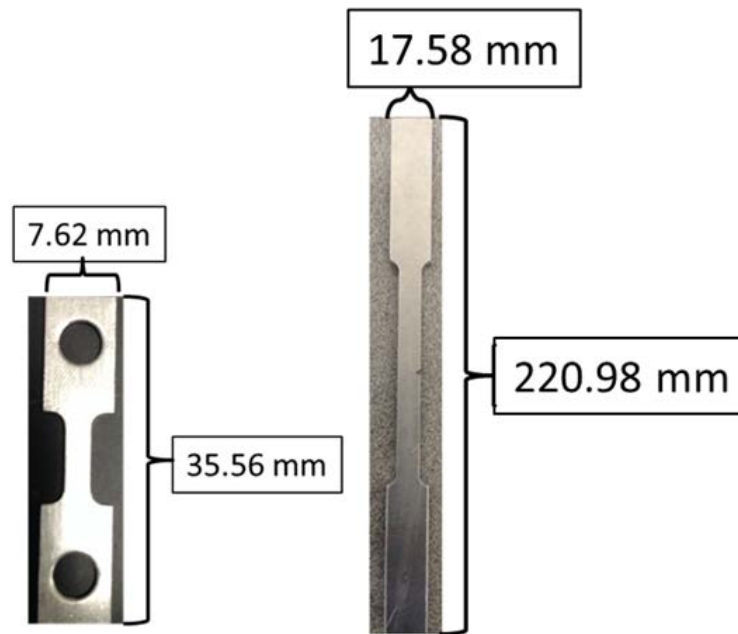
Final product after being machined. (Left) Al5083 Microtester Specimen, 1.02 mm thick. (Right) INSTRON tensile specimen, 6.15 mm thick.
